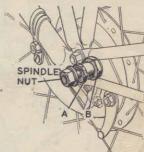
Adjustment of the rear wheel bearing takes place on the brakedrum side of the hub.
